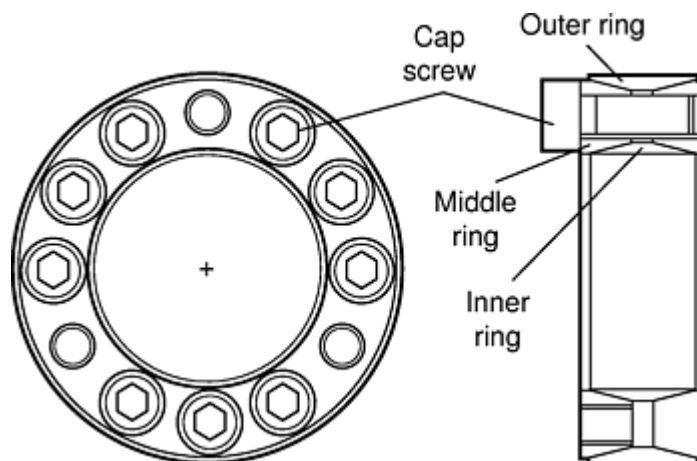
Plan view (left) and cross section (right) through tapered-ring locking device assembly.
